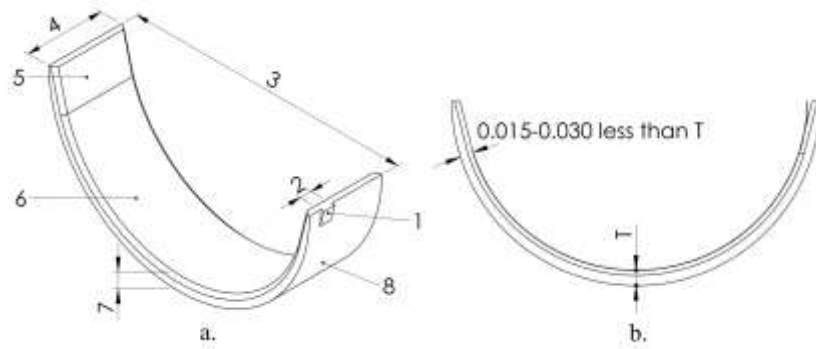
Terms and major dimensions of a big-end bearing: 1 Locating lug; 2 Locating lug width; 3 Free spread; 4 Bearing length; 5 Crush relief; 6 Bearing surface; 7 Bearing wall thickness; 8 Bearing back
